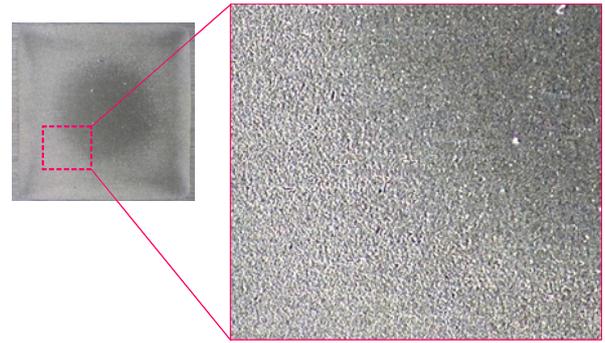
Enlarged view of surface texture machined by electrode finished by mesh #1000 sand paper
